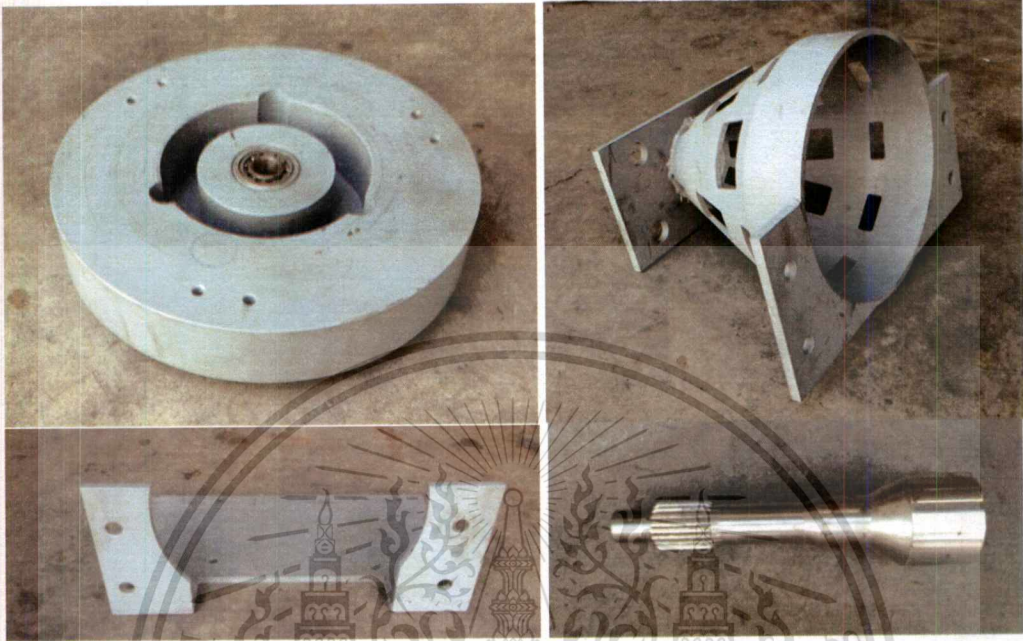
Constructed Prototype parts for the direct clutch system prototype
